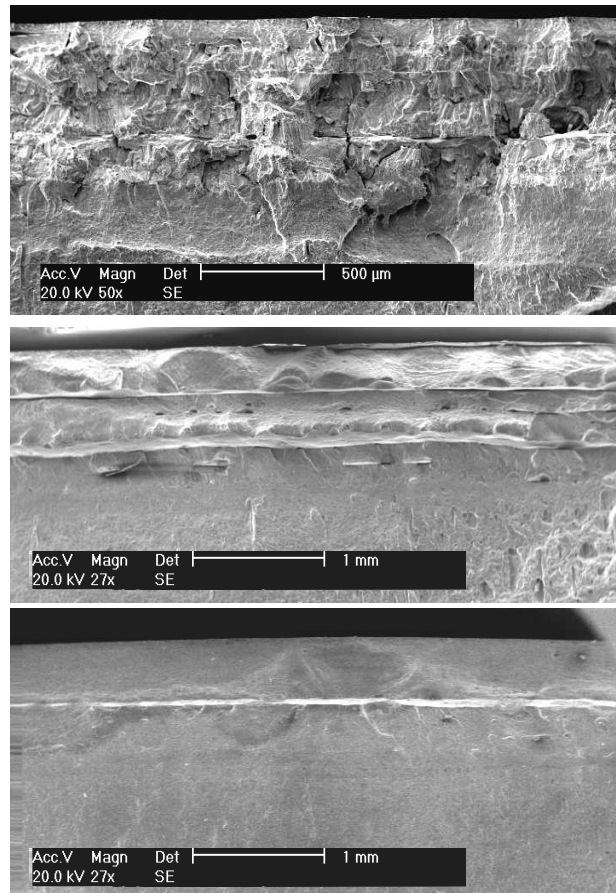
Fatigue fracture appearance of the P20 welded specimens filled with type A, B and C filler wires. $R=0$, $\Delta\sigma = 500$ MPa.
